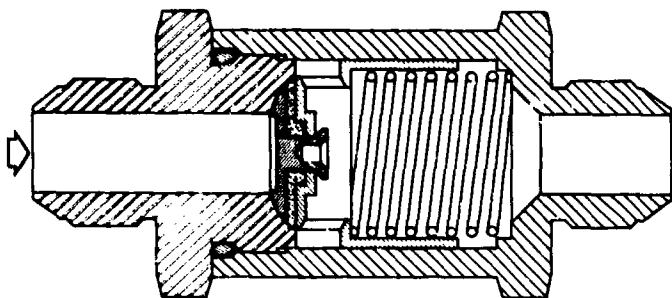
Poppet-Type Check Valve With a Soft Seal and a Spherical Seat
